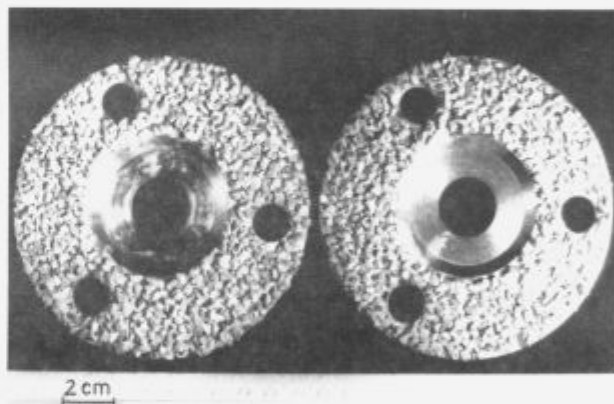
Macroscopic photo of grinding wheels manufactured at IMT Ljubljana
